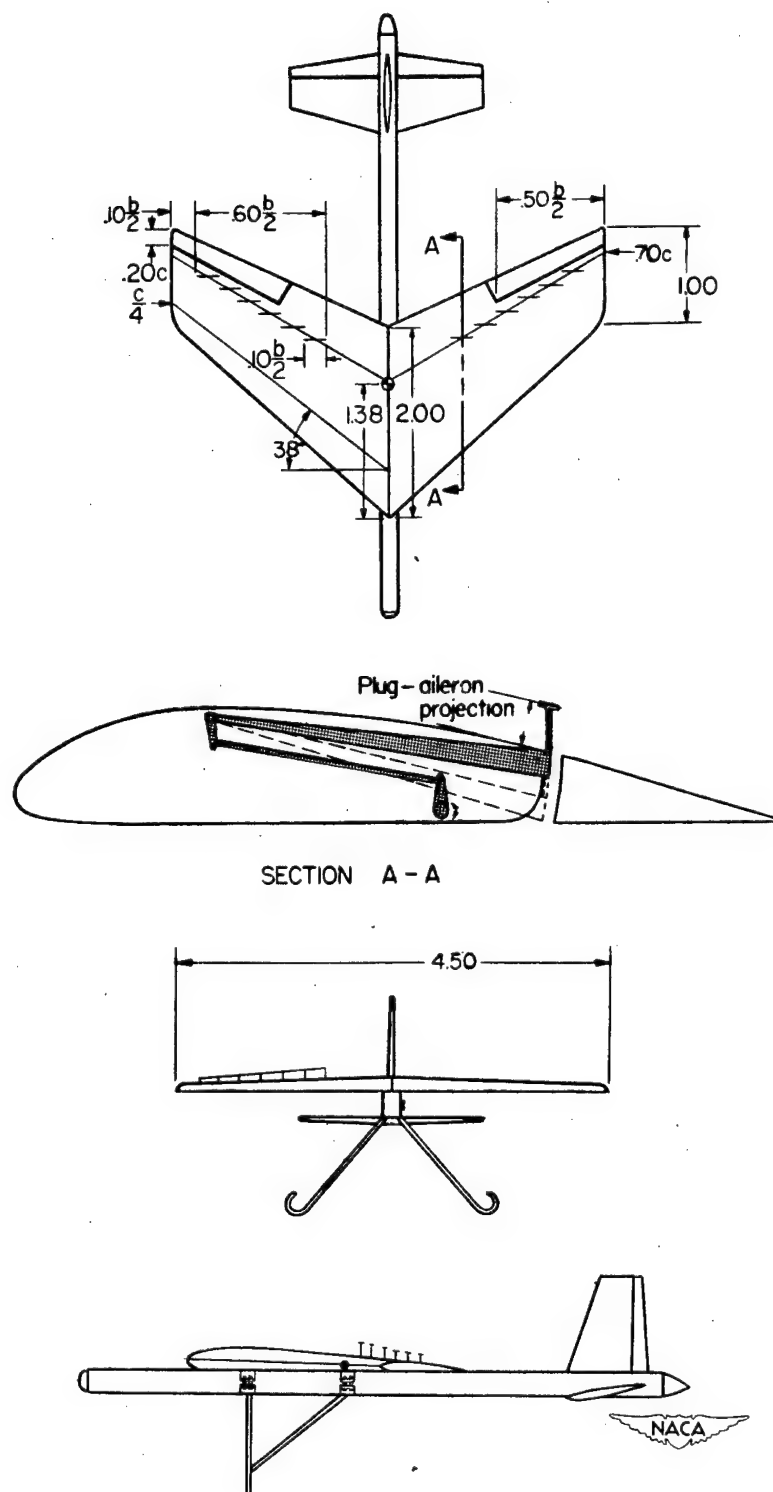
Three-view sketch of free-flight-tunnel model and cross section of wing showing details of plug ailerons. All dimensions are in feet unless otherwise specified.
